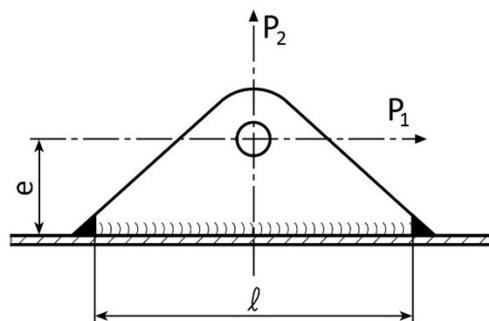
Weld joint of a vertically mounted lifting eye
